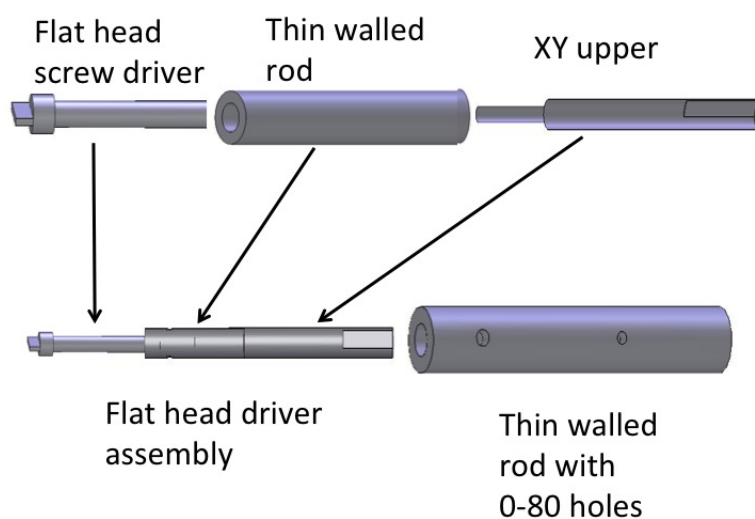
Illustration of the xy feedthroughs. The xy feedthroughs have three components - flat head driver, 0.1" thin walled stainless steel rod and xy upper. All these parts are epoxied together to form the xy feedthrough at the lower end of the insert.
